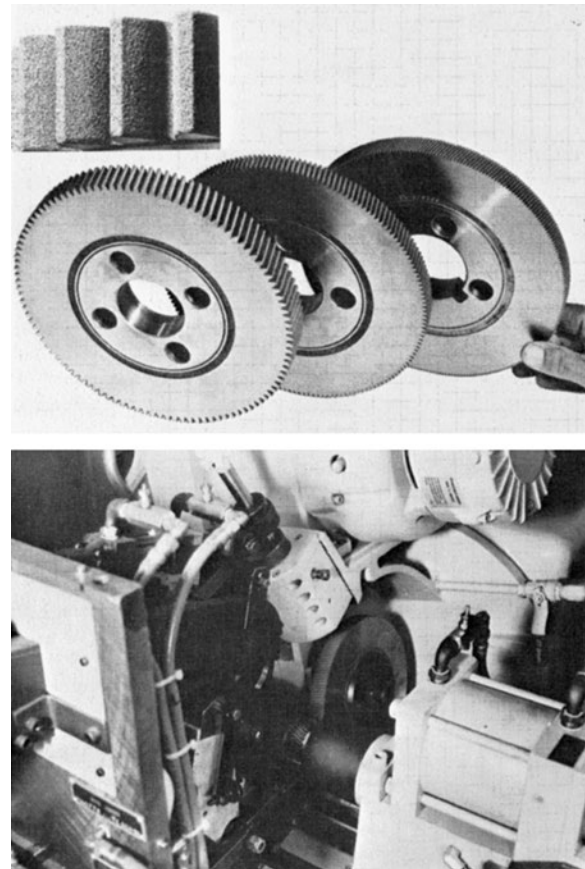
Gear hones with abrasives bonded to metal and a gear honing arrangement. (Courtesy of National Broach and Machine Co., a division of Lear Siegler, Inc., Detroit, Michigan.)
